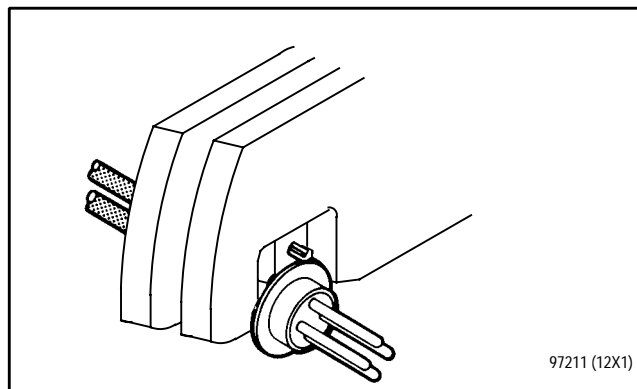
Installation of Lead Wires Into Insulator Assembly (Sheet 6 of 6)
